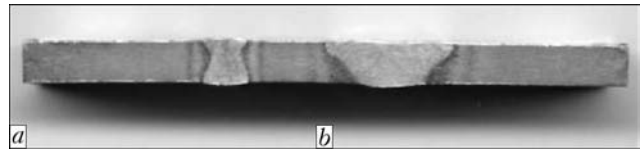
Transverse macrosections of through-penetration welds made on Nimonic-75 alloy by A-TIG welding at $I_w = 100$ A (*a*) and TIG welding at $I_w = 180$ A (*b*) at the same (200 mm/min) welding speed
